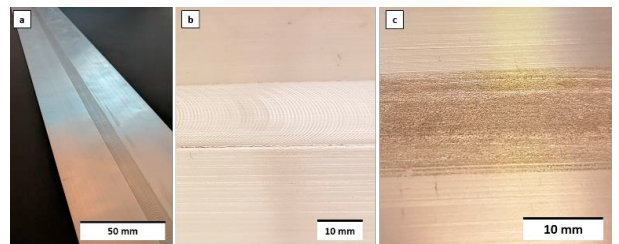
Photographs of the 2 mm AA6060-T6 HYB butt joint; (a) Overview of as-welded profile, (b) Close-up of weld face, (c) Close-up of weld root.
